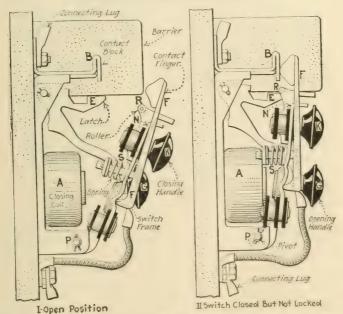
Illustrating method of closing and locking of a mechanically-held-closed remote-controlled switch, simplified for purposes of illustration. (Cutler-Hammer Mfg. Co.)
